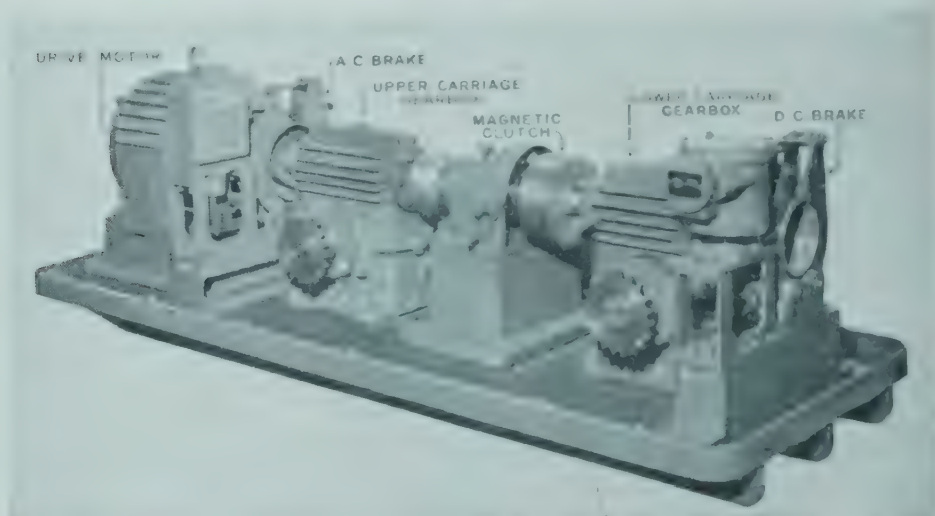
Drive and gear-box mechanism for the Duplex carriage
